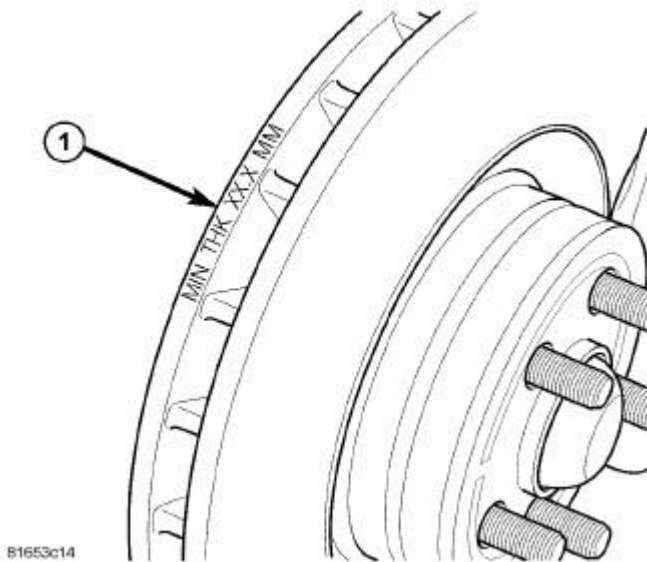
MINIMUM THICKNESS MARKINGS ON ROTORS EDGE
